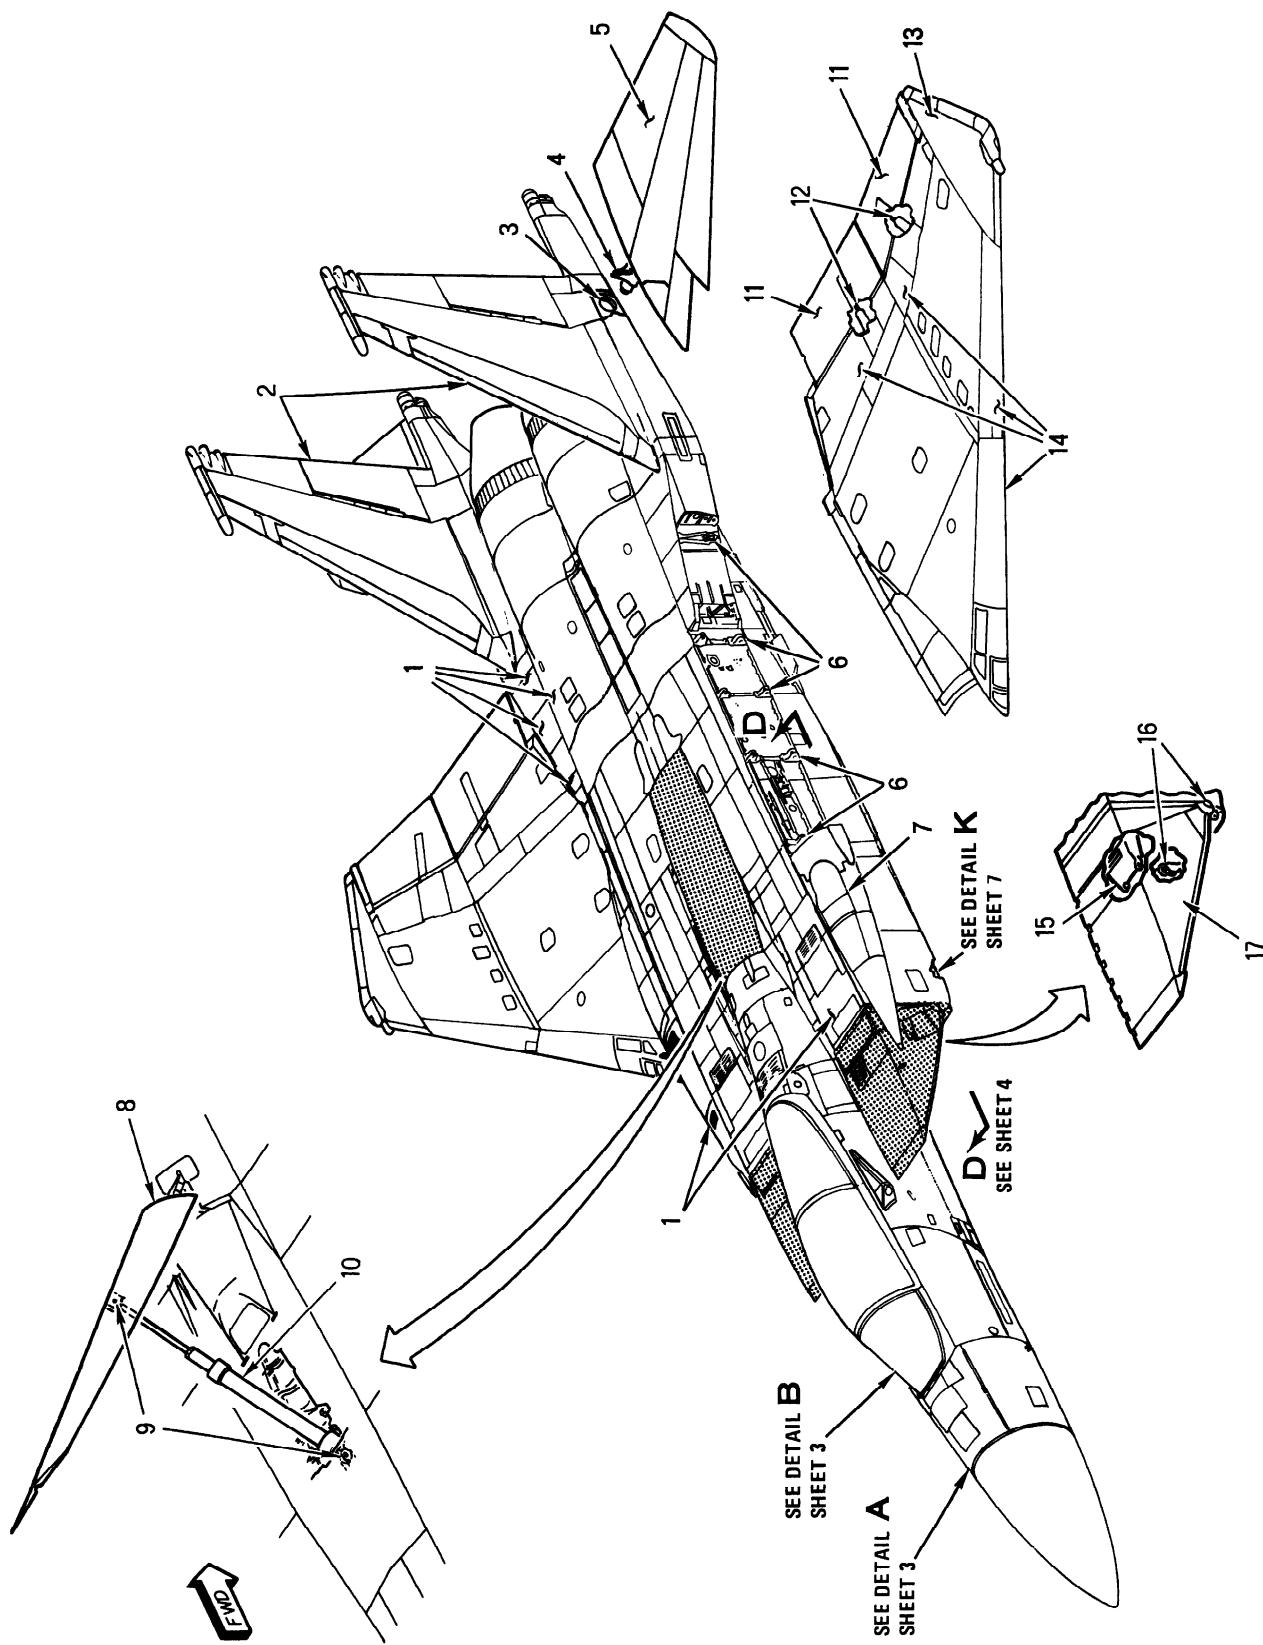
Preliminary Visual Inspection (Sheet 4)
